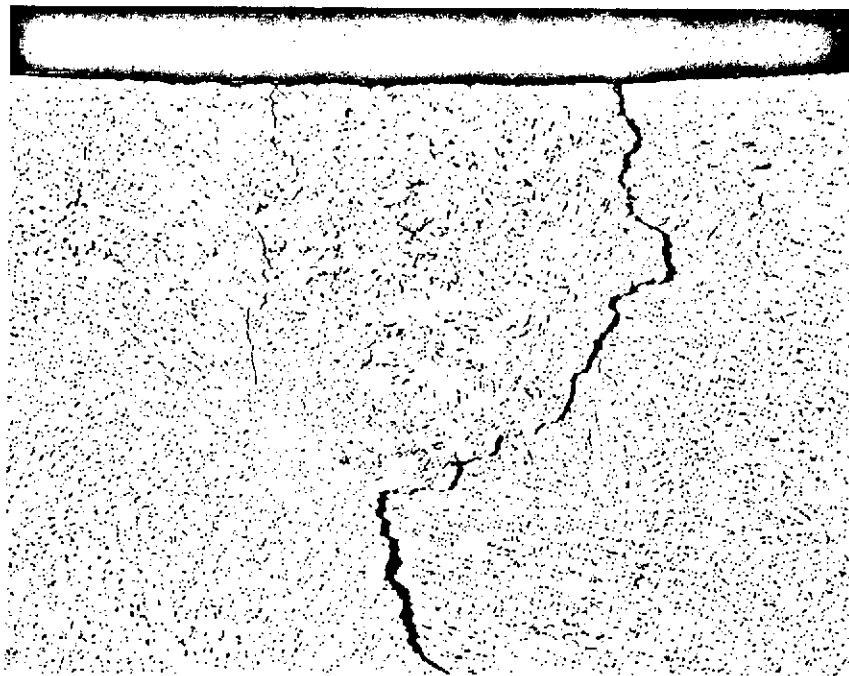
SECTION THROUGH CRACK NEAR WELD START
